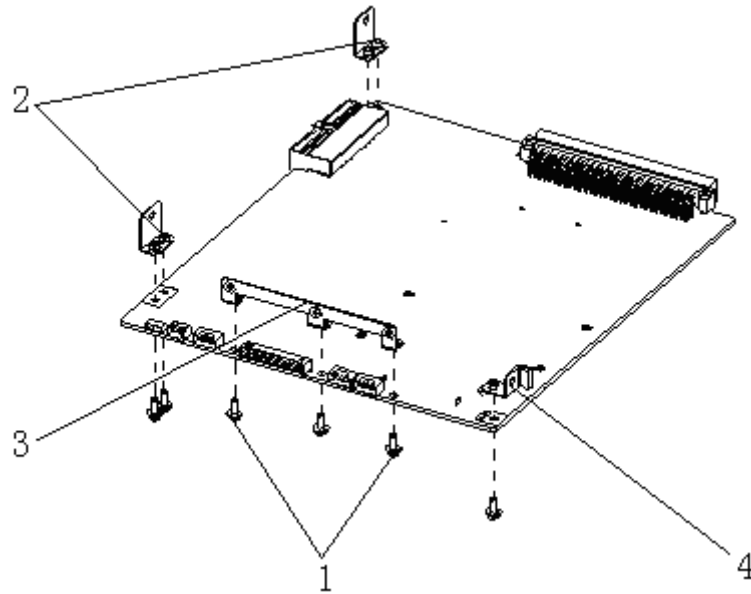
Sketch Map of Probe Board and Mian Board Disassembly (5)
